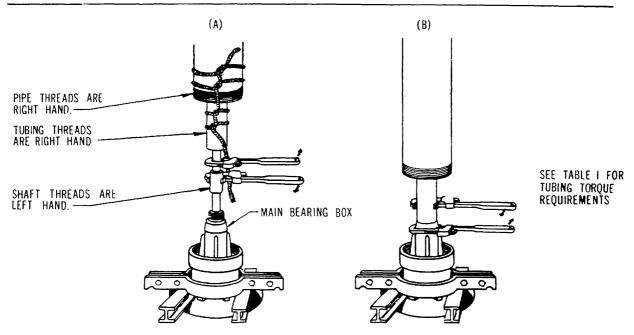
ASSEMBLING SHAFT AND TUBING ON ENCLOSED LINESHAFT COLUMN
